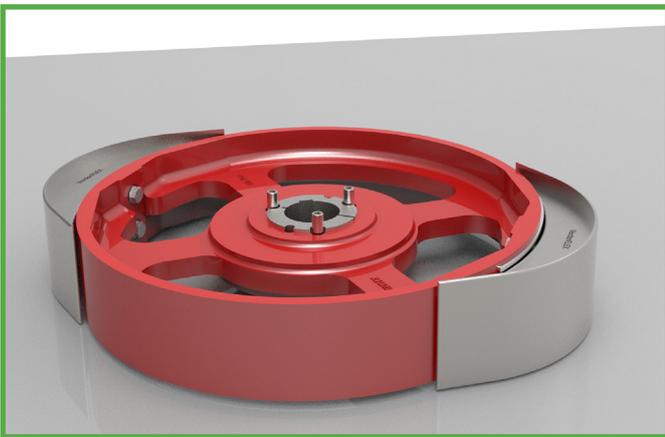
Mounting Rotor Shoes on the Rotor (Step 2)
